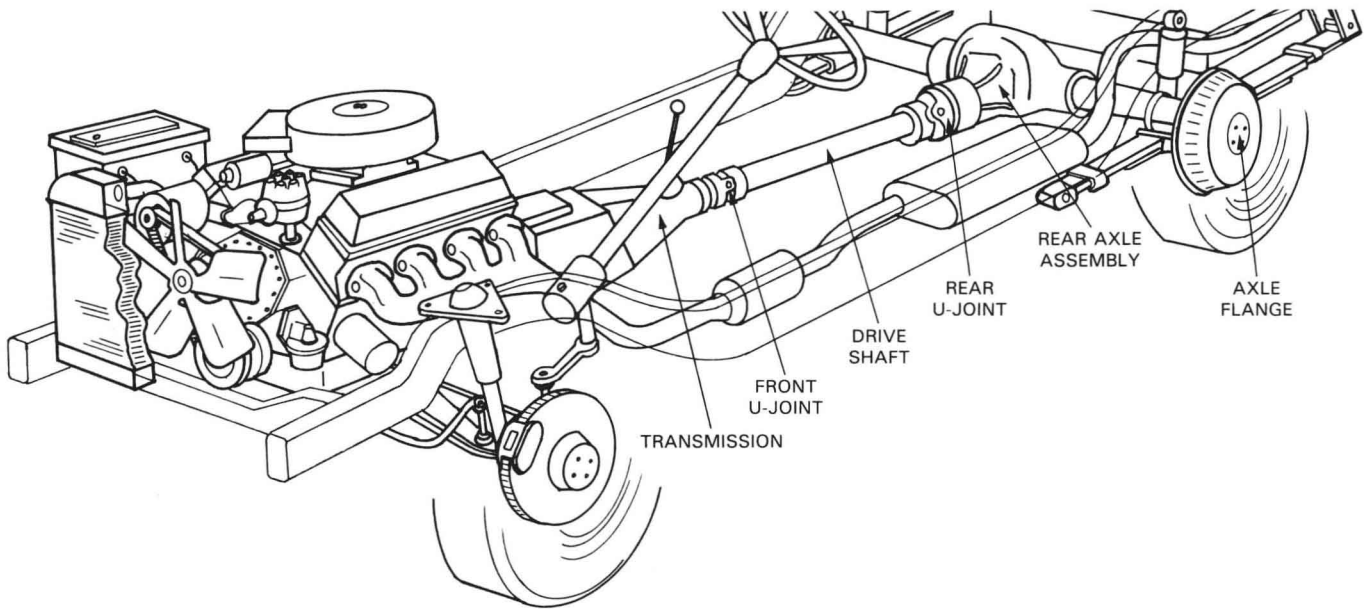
This shows how the drive train components of a rear-wheel drive vehicle relate to the other chassis components. The transmission is always directly behind the engine, and the drive shaft connects the transmission to the rear axle assembly.
